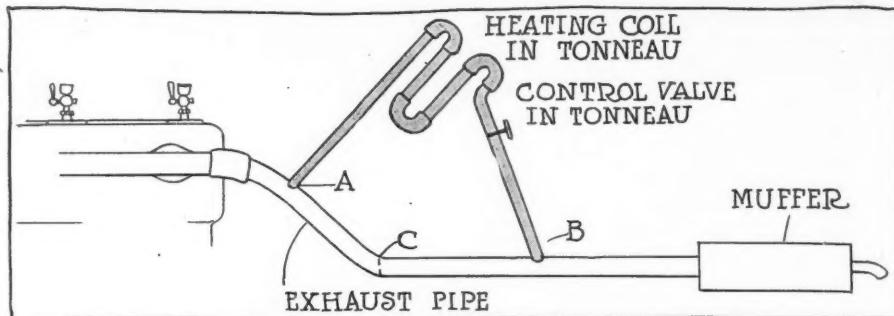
SUGGESTED METHOD OF HEATING A MOTOR CAR
